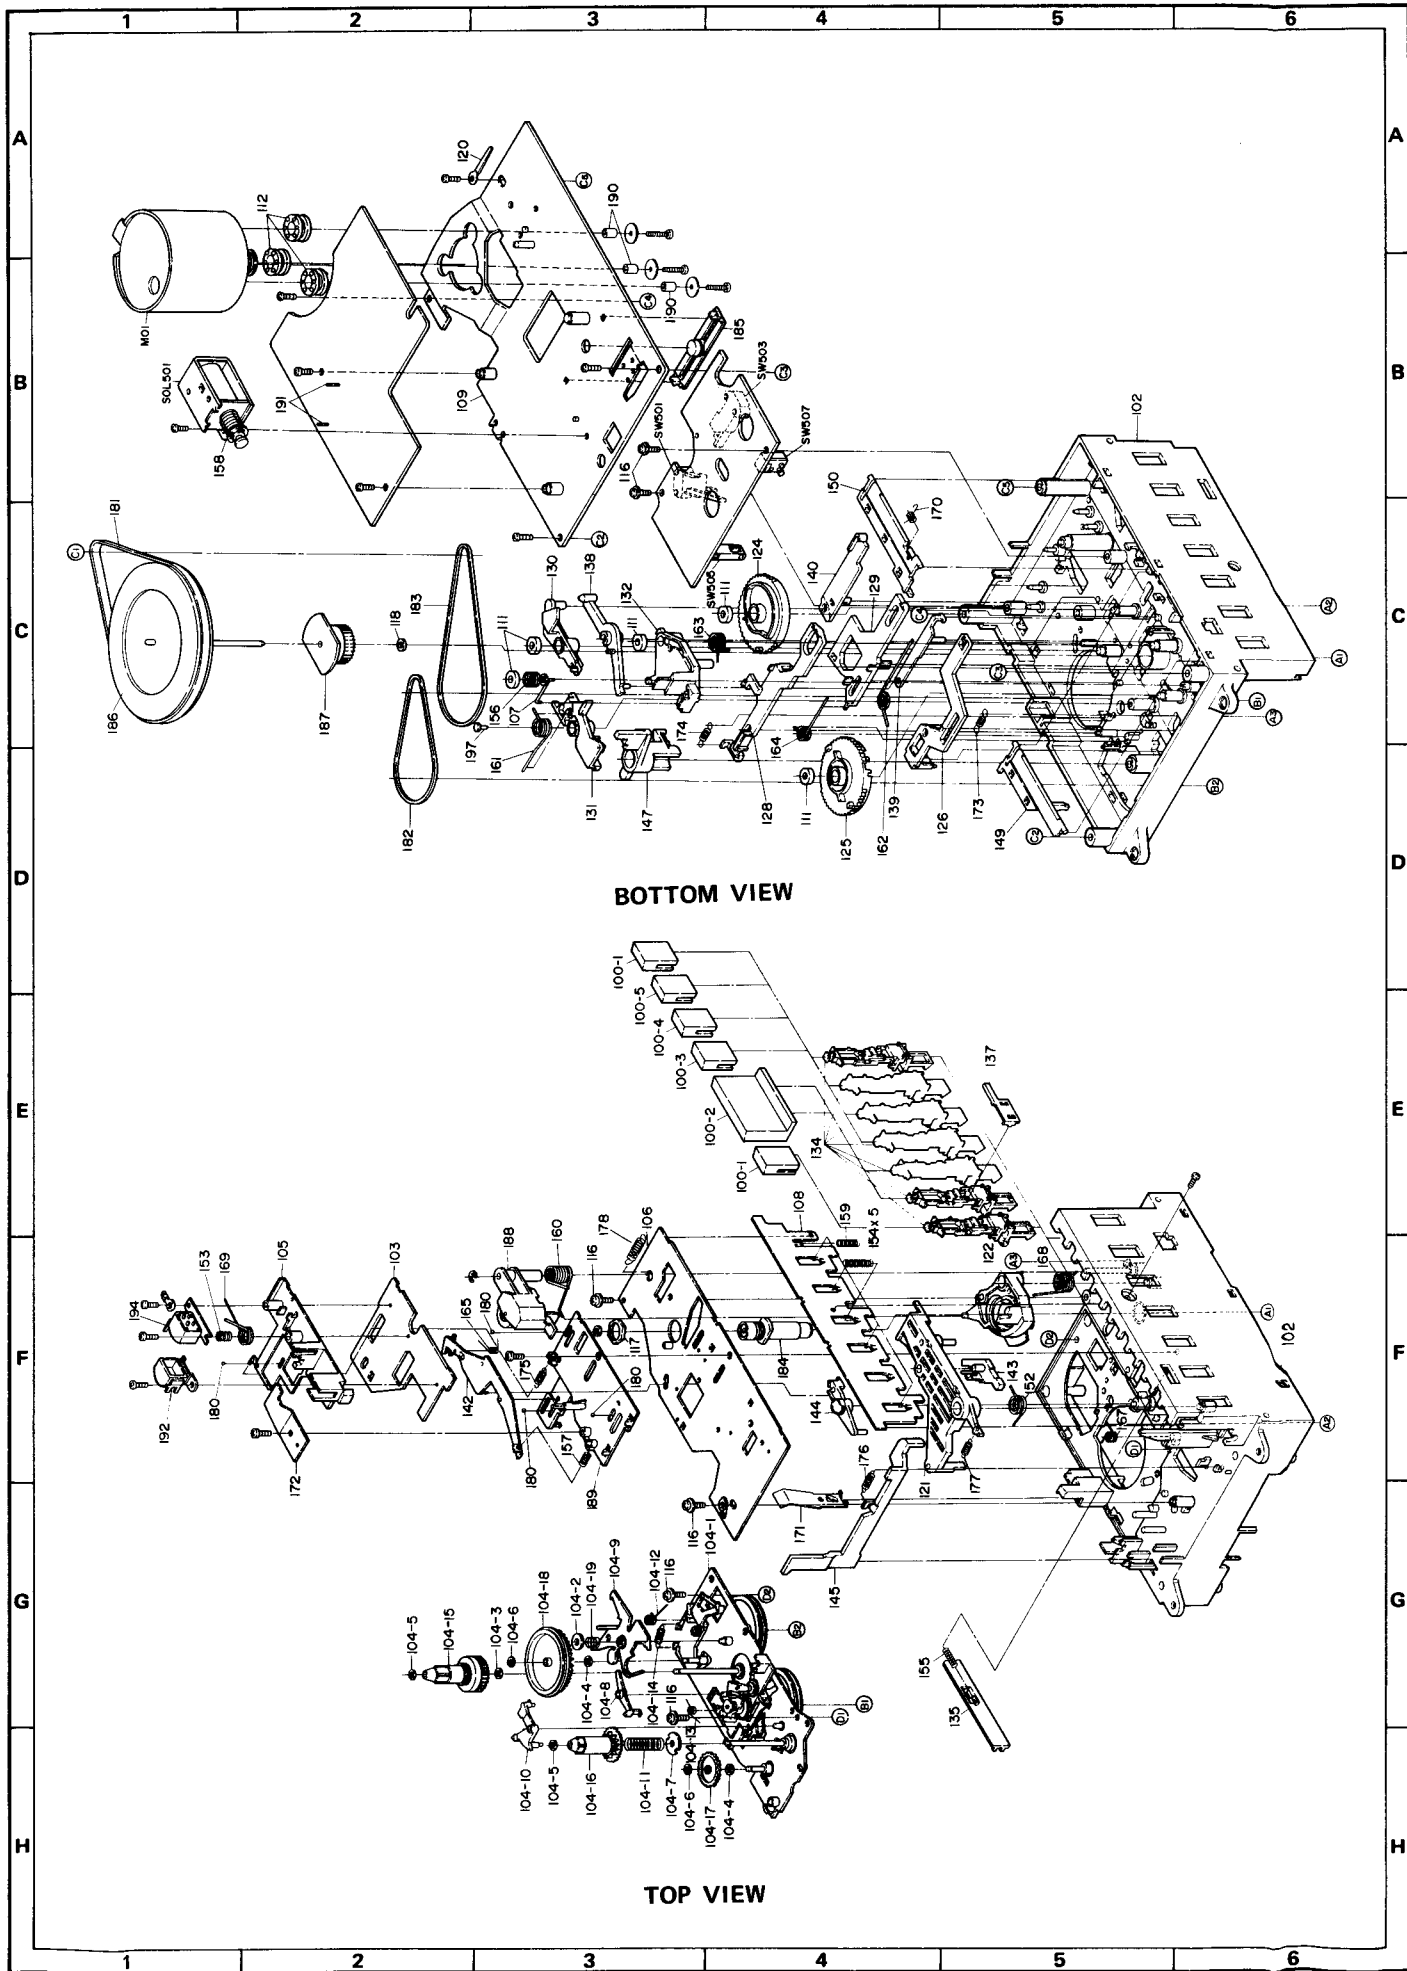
DECK 1 MECHANISM EXPLODED VIEW
